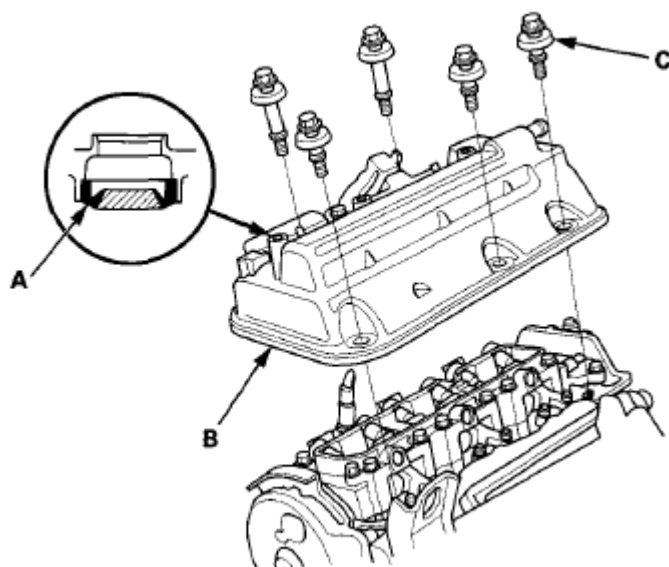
Setting Spark Plug Seals On Spark Plug Tubes
